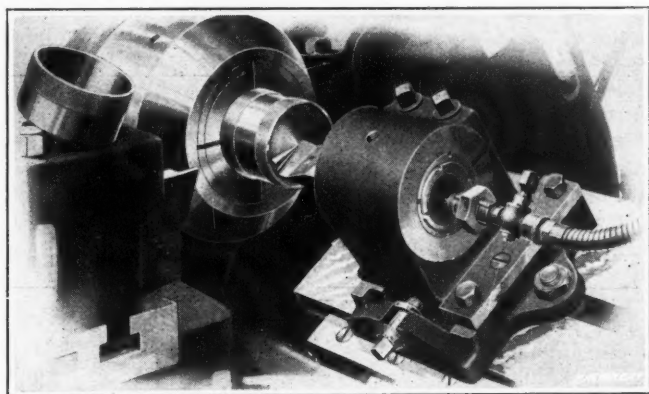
Set-over Tool-holder in Operation on 3-inch Hole
